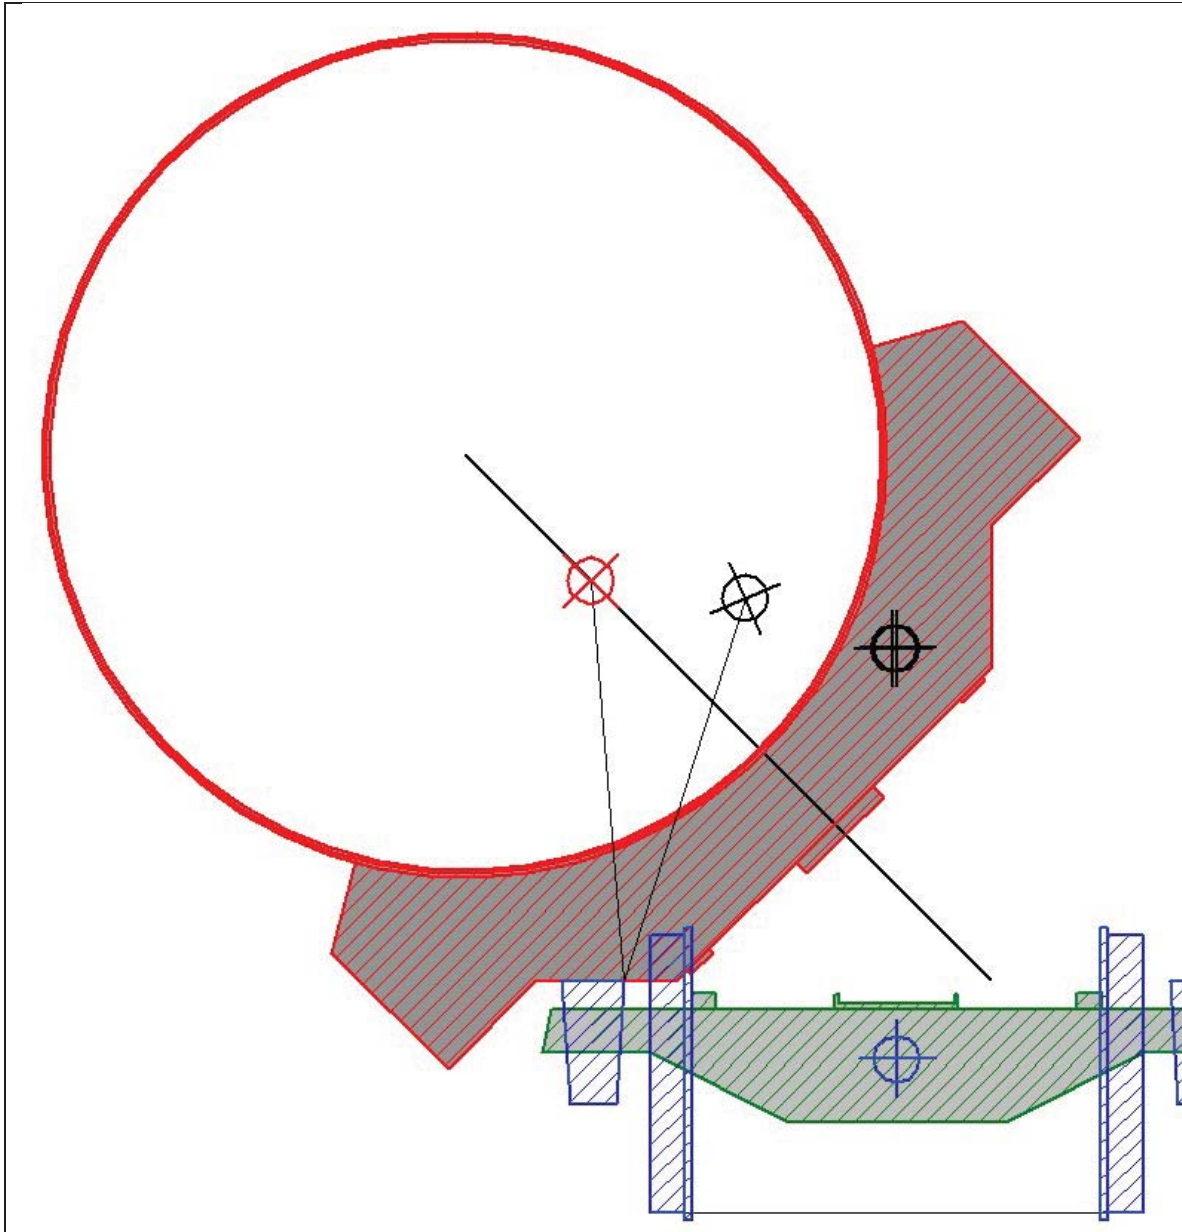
Car body has rolled about the inside corner of the side frame, until the body bolster lies flat on the side frame.
